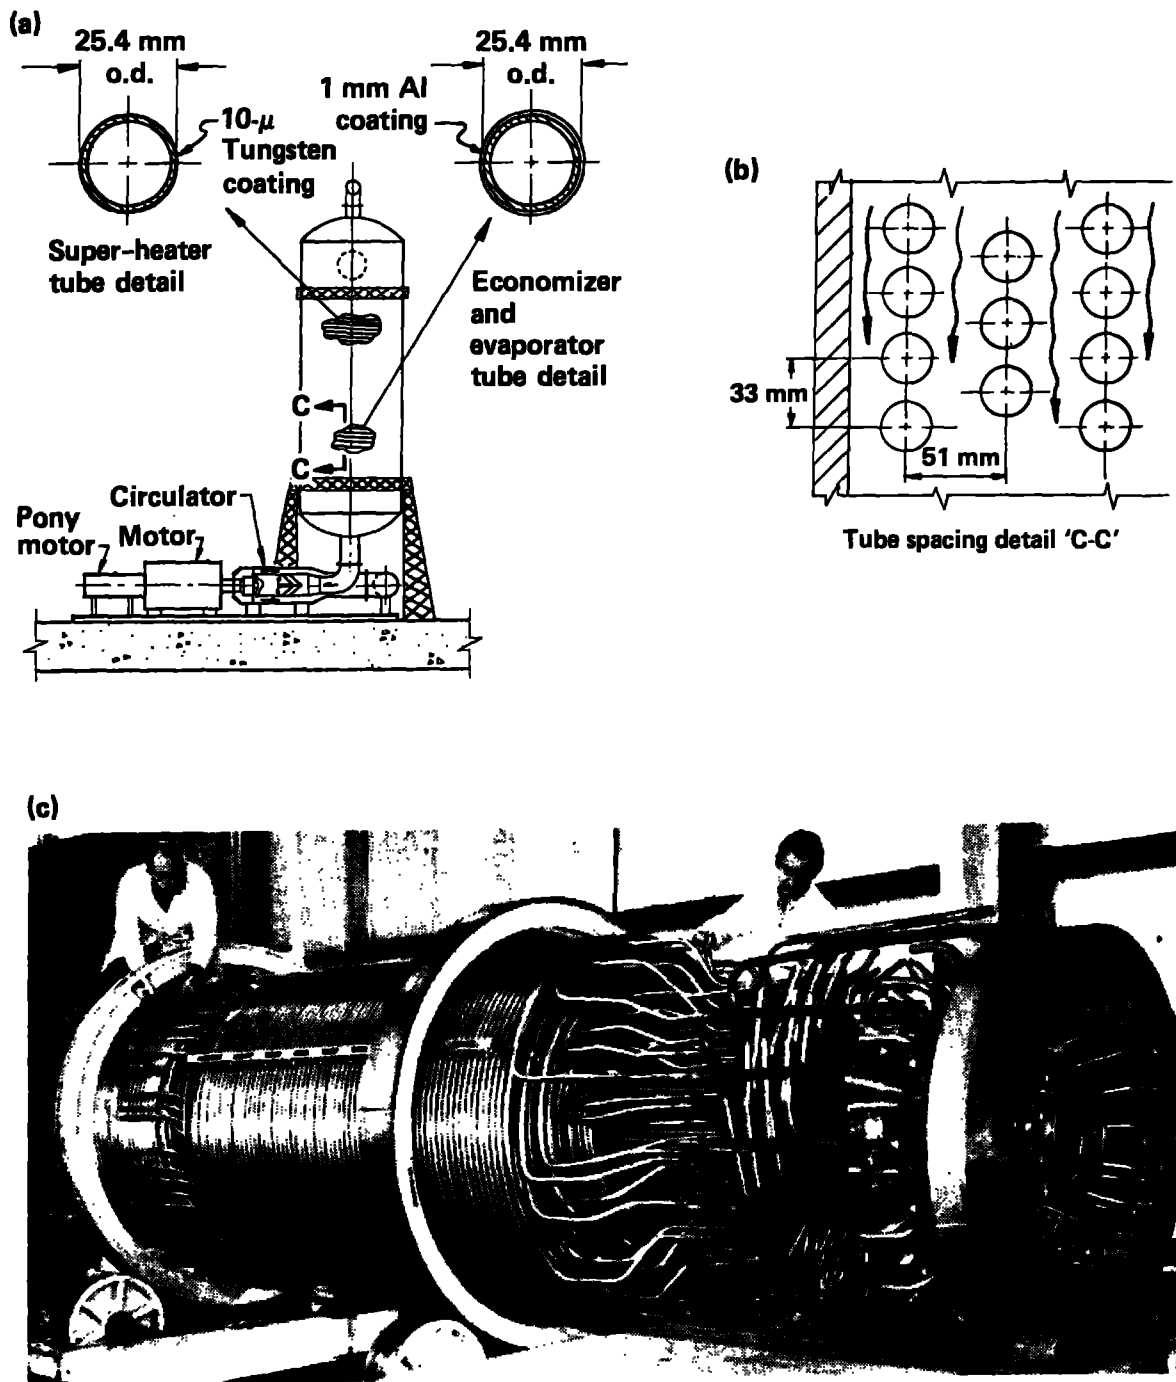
Steam generator arrangement. (a) Section 'B-B', (b) Typical tube spacing detail, (c) Fort Sait Vrain steam generator.
